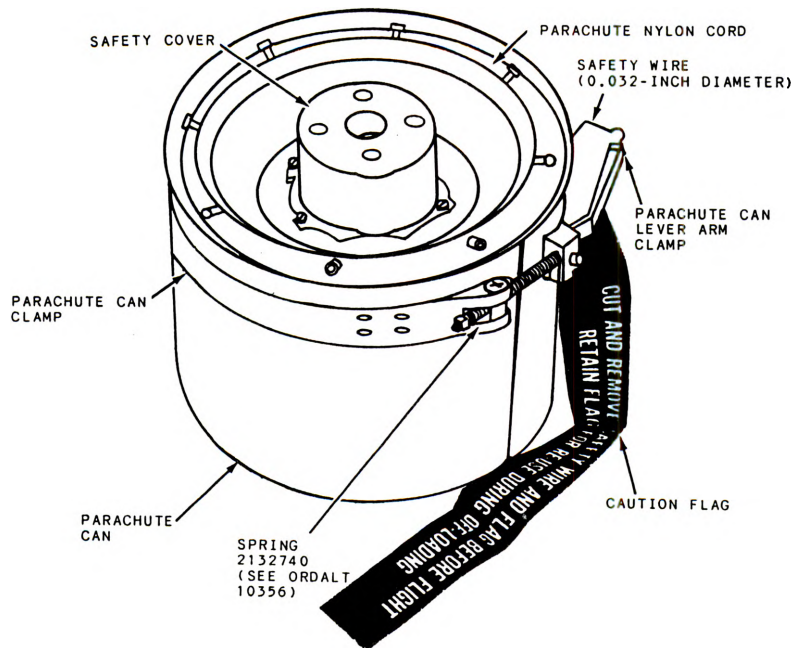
Mk 28 Mod 2 torpedo air stabilizer.
